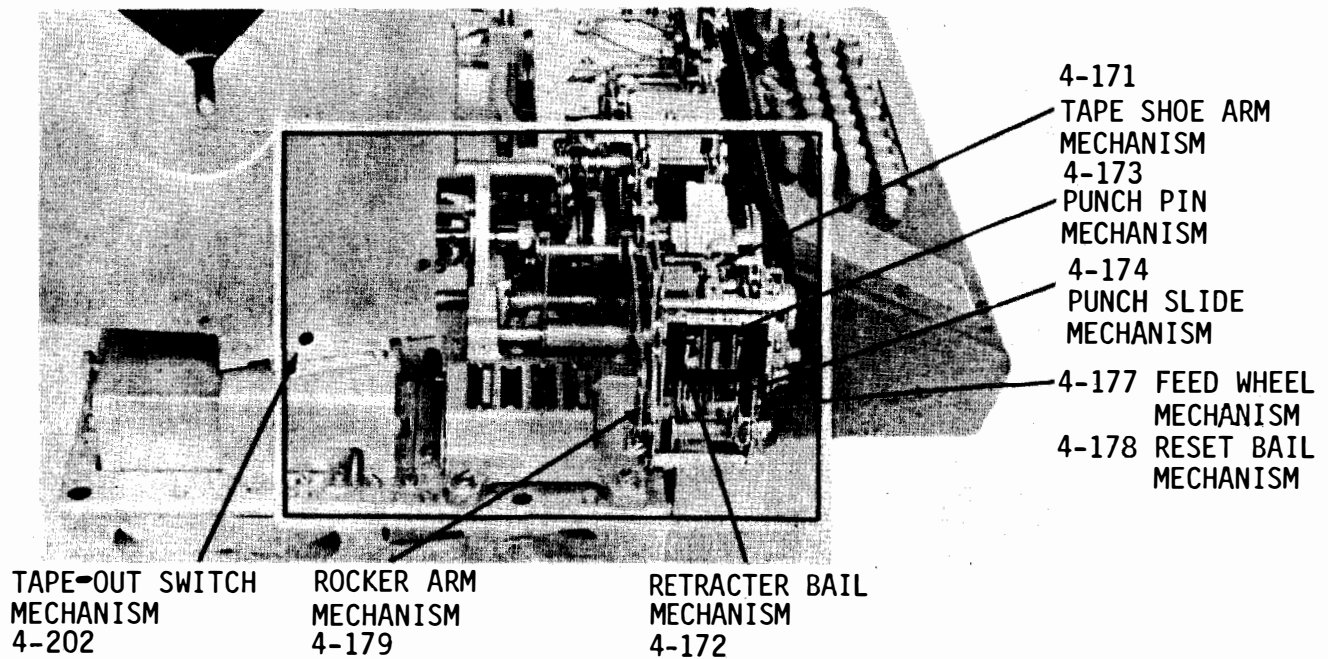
Punch Mechanism - Reset Perforator Transmitter, Left Side View
